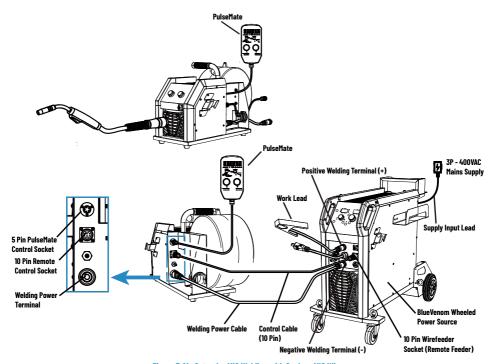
Setup for MIG Welding with Gasless MIG Wire
